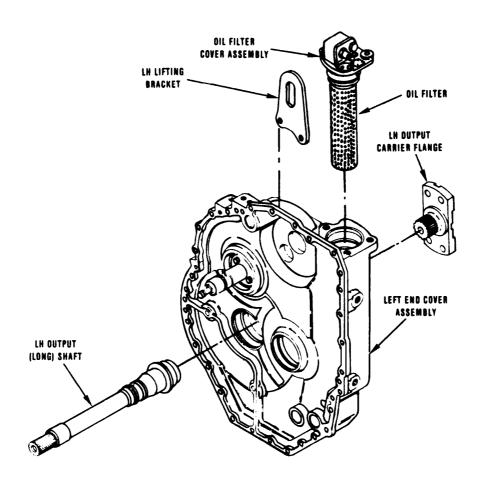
Exploded View of Major Components Left End Cover Assembly
